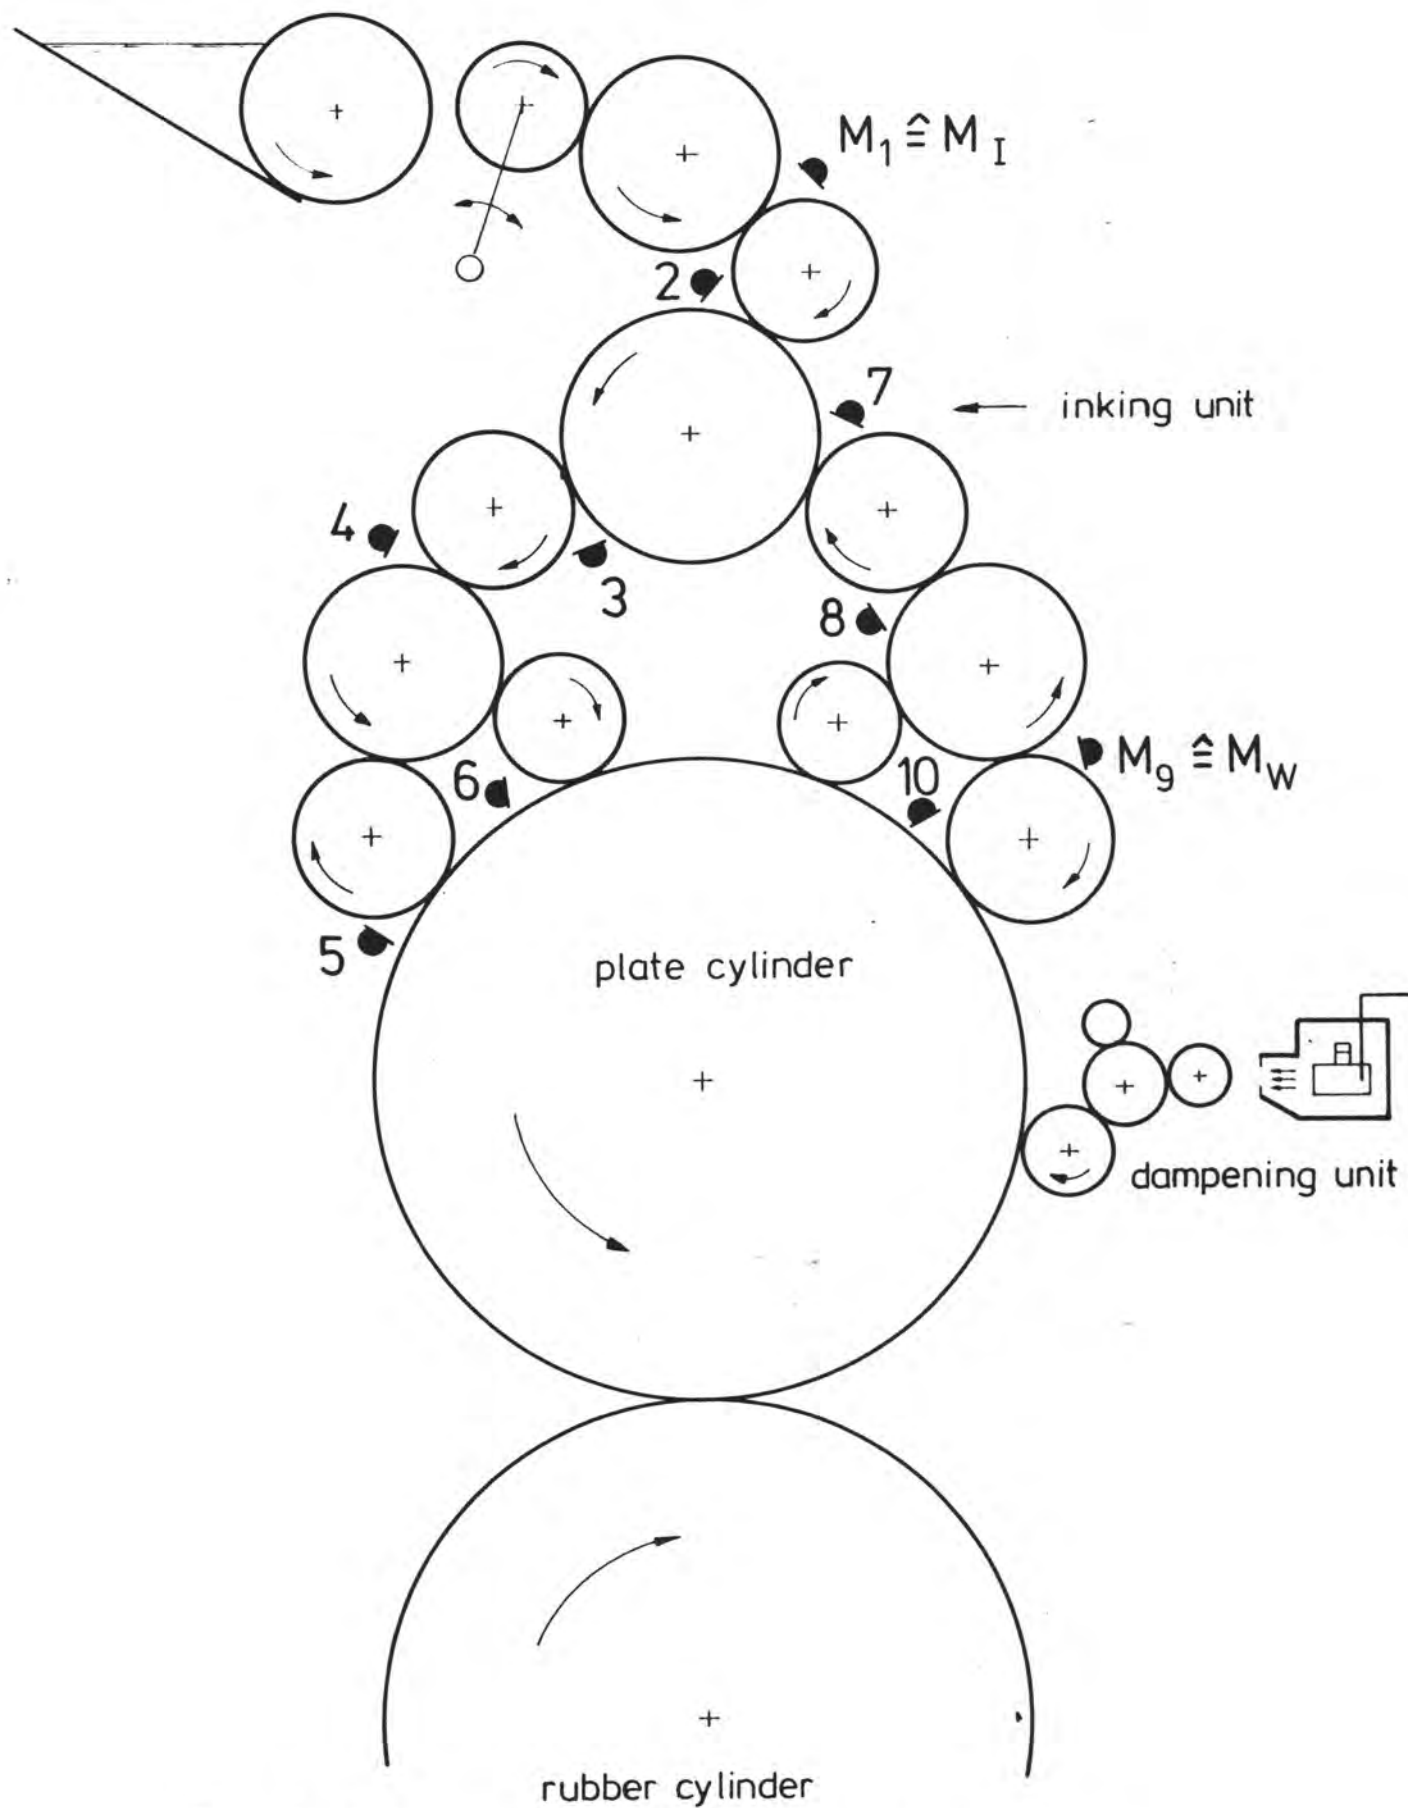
Offset press (sheet fed) equipped with ultrasonic sensors
